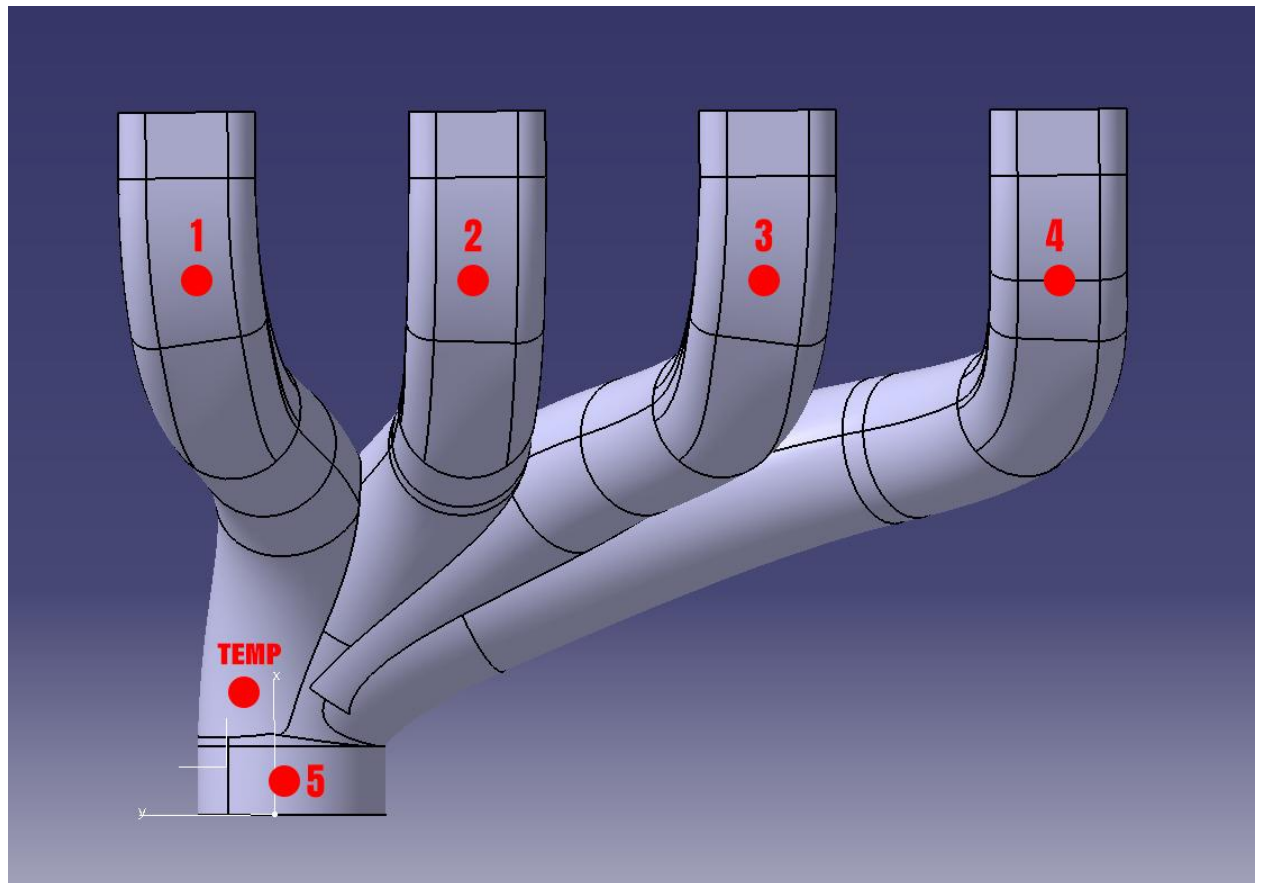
Measurement points on the exhaust manifold in the practical part
